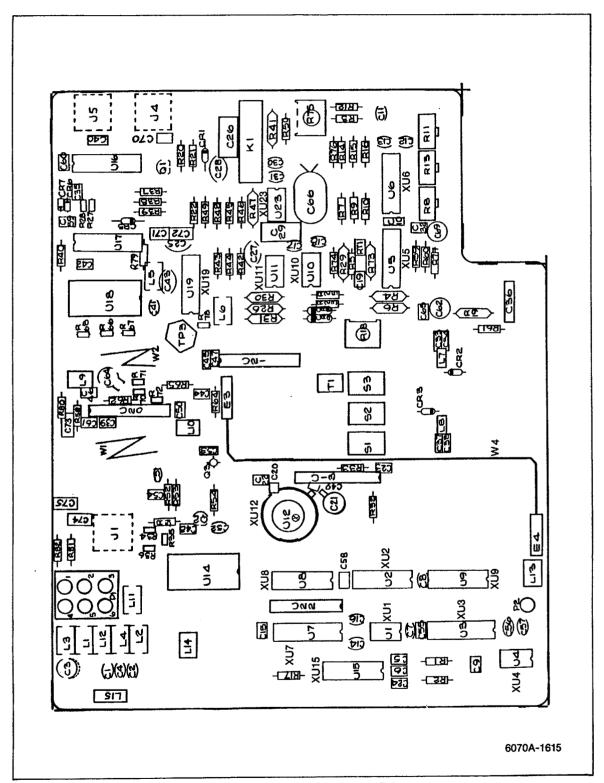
A4A8 Hetrodyne Oscillator PCB Assembly
